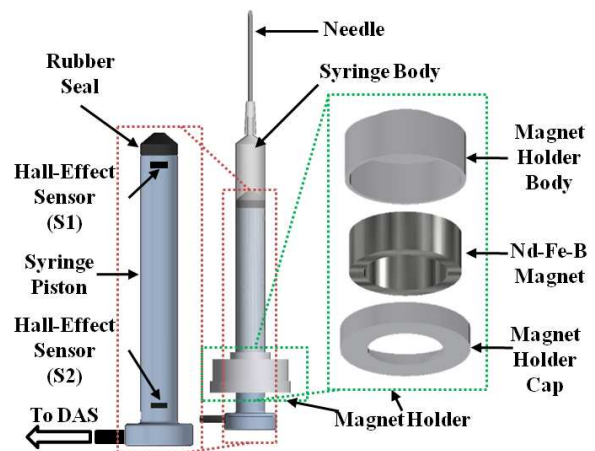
The various parts of the syringe assembly showing the special piston with dual Hall-effect sensors and magnet holder with ring magnet disassembled from the syringe body.
